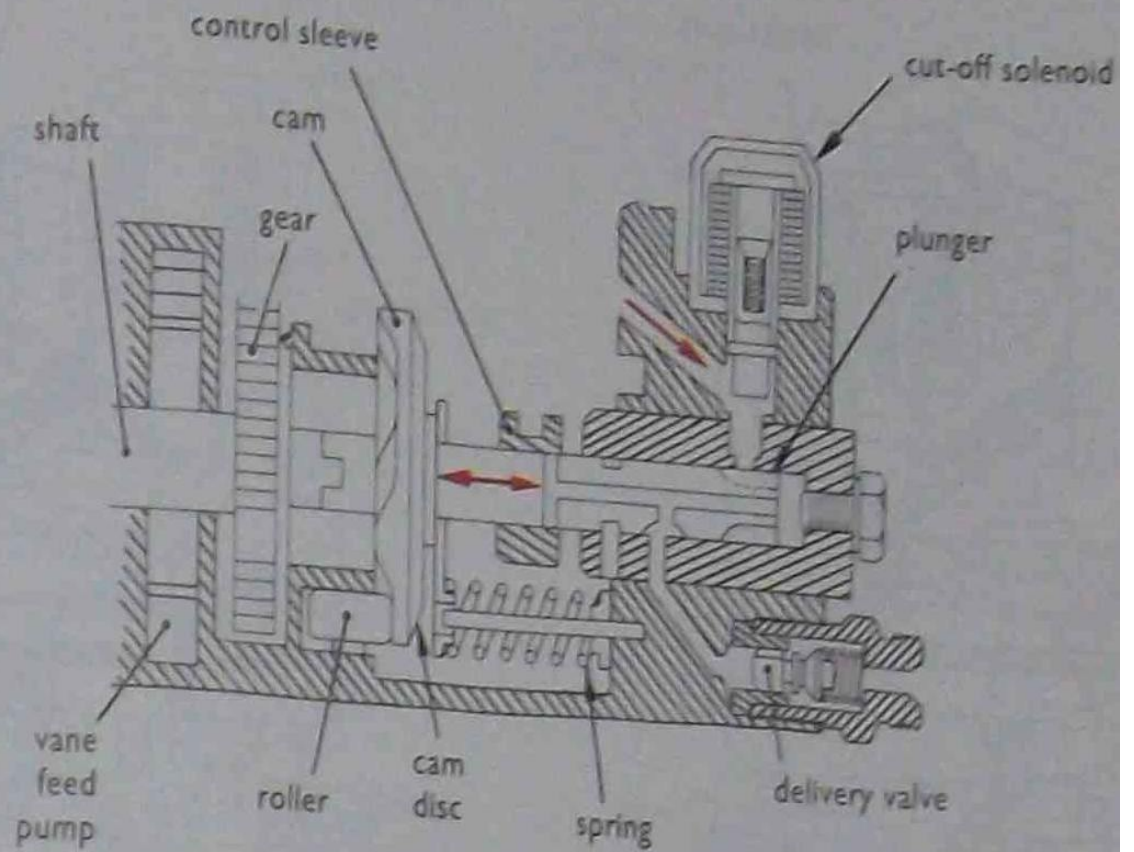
Schematic arrangement of a distributor-type injection pump ZEXEL
